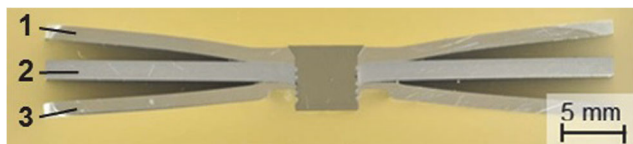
Large deformation of aluminum alloy while joining to UHSS using SSPR process (workpieces 1 and 3 are AA 6014 and workpiece 2 is 22MnB5) [139]
